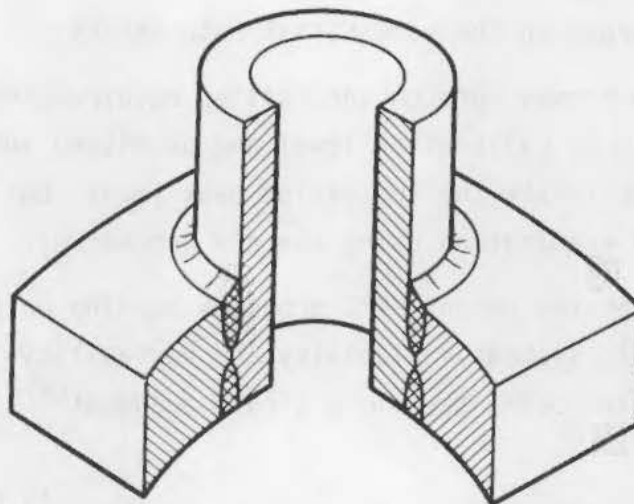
PVRC Weld Specimen 155, 40 (102 cm) x 48 (210 cm) x 8-1/2 (22 cm)
